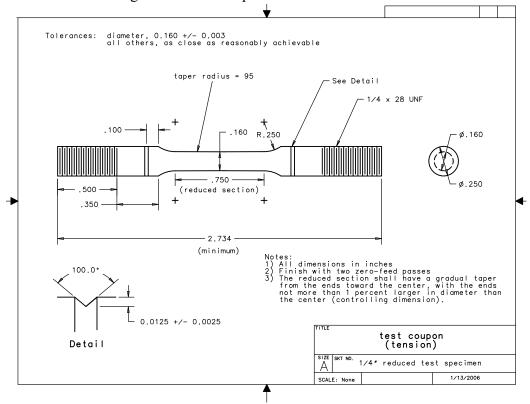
Round, small-sized 0.160-inch diameter quasi-static tensile test specimen used for additional testing of 1/4-inch thick plate.
